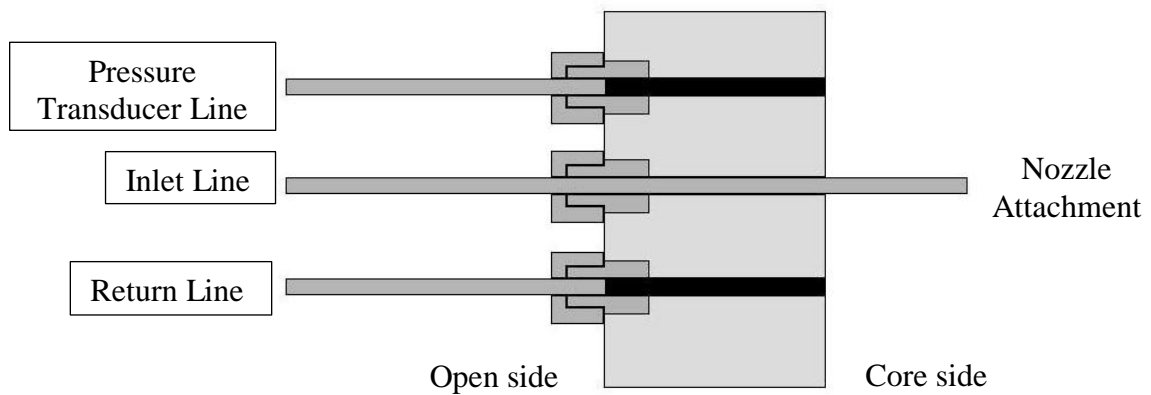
Inlet Holder Cross Section with MNPT Fitting, Tubing, and Nut
